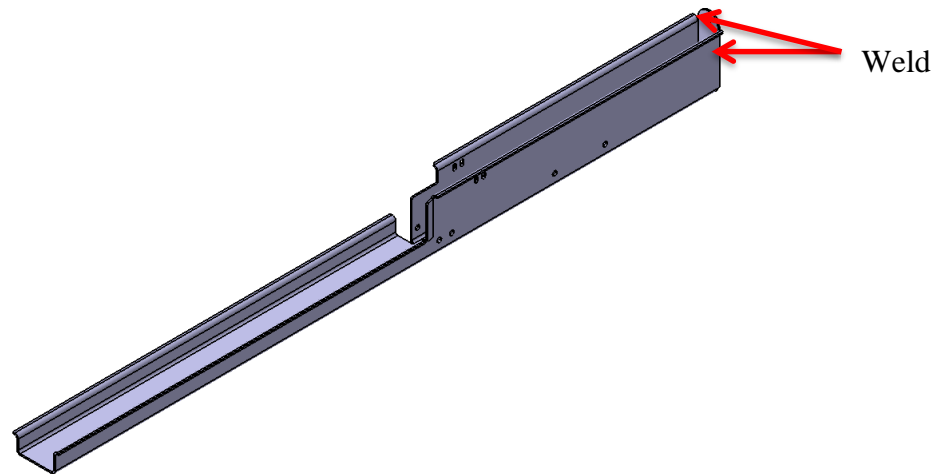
Sheet metal part after laser cutting and CNC bending
